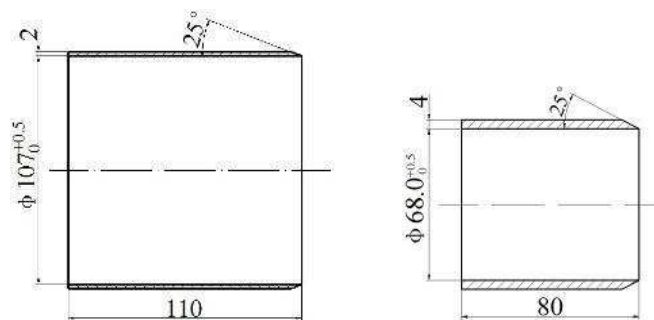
Tubular blanks: (a) Welded ASTM A36 steel tube, (b) Seamless ASTM 1020 steel tube.
